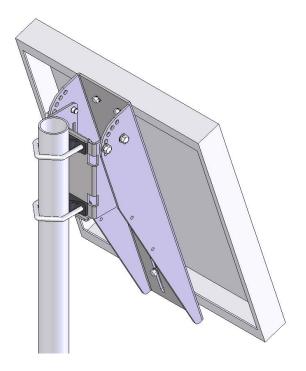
Solar panel mounted on pole using the multi-mount bracket
